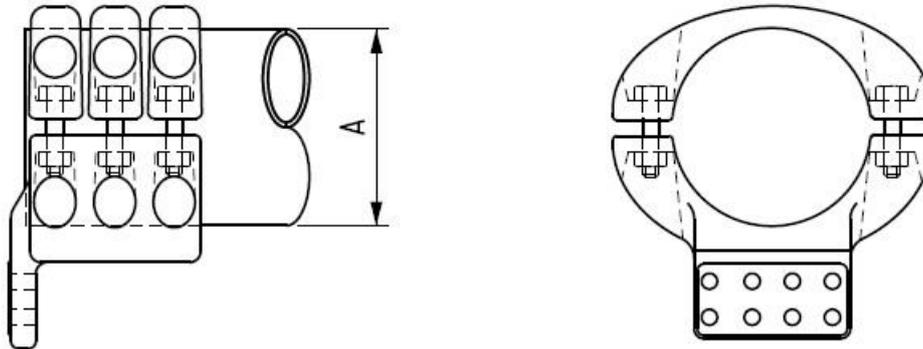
ECC-9HH: Coupling Clamp –9-Hole Horizontal Palm – Equipment Mounted
